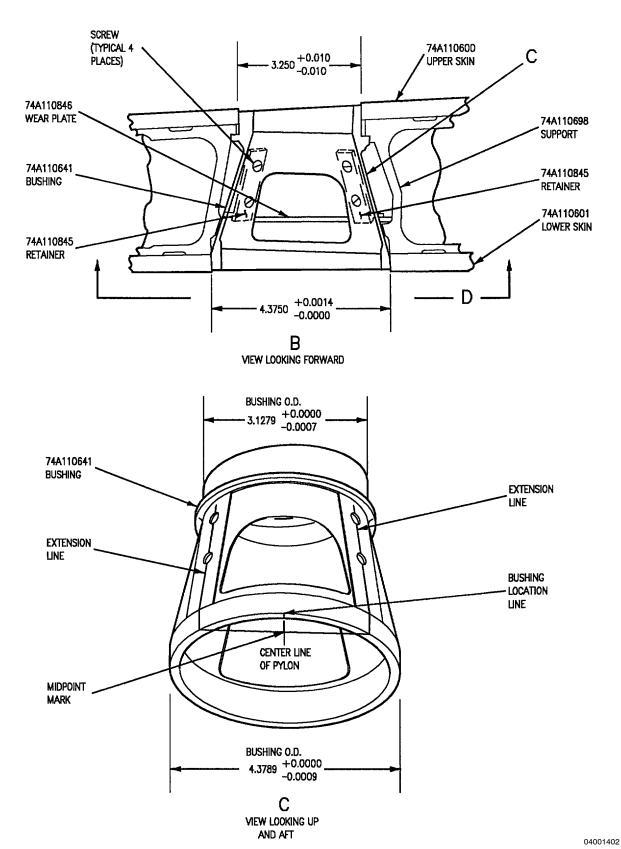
Outboard Pylon Bushing Alignment (Sheet 2)
